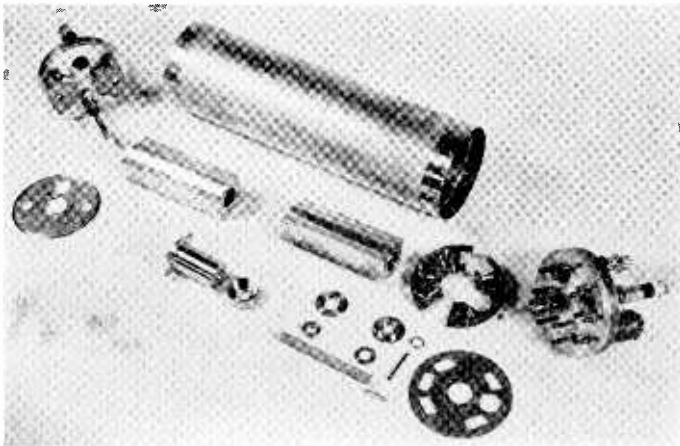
Component parts of the coaxial-cavity electron coupler shown in Figure 8.
